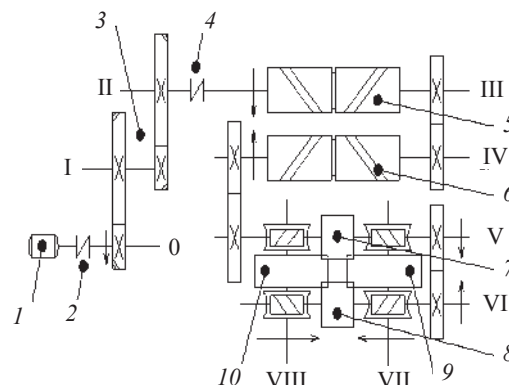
Diagram of the drive system in motion: 1 — motor; 2, 4 — coupling; 3 — two-stage cylinder gear speed reducer; 5, 6 — sugarcane feeding roller; 7, 8 — second-stage squeezing roller; 9, 10 — third-stage squeezing roller
